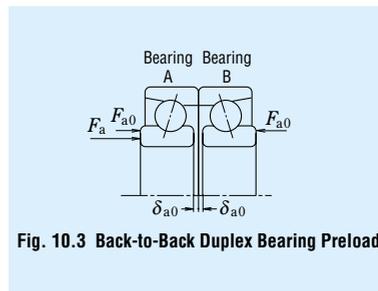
Back-to-Back Duplex Bearing Preload
